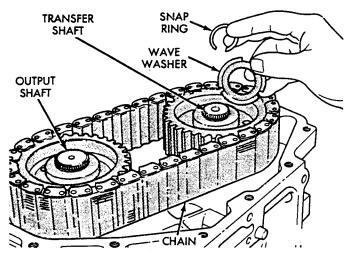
Remove Transfer Shaft Sprocket Snap Ring and Wave Washer
